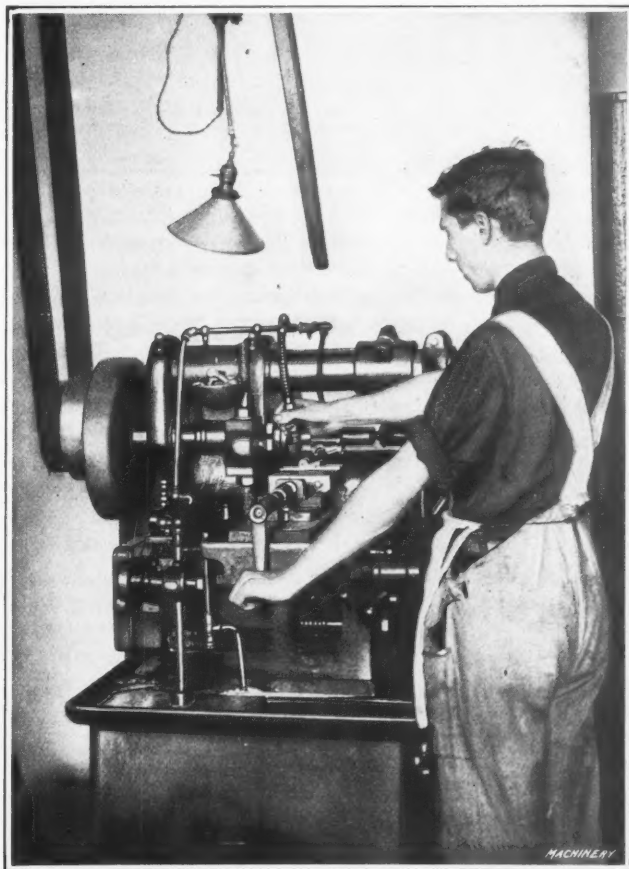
Milling Machine provided with Auxiliary Lubricant Tube for supplying Flow of Cutting Compound to wash away Chips
